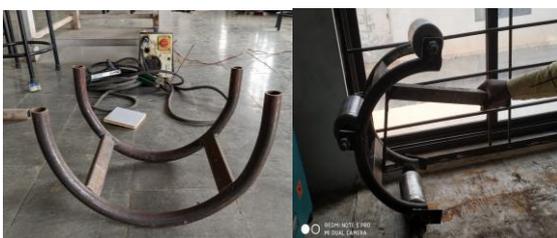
C- Frame Chassis after fabrication -info [2.2.2]
